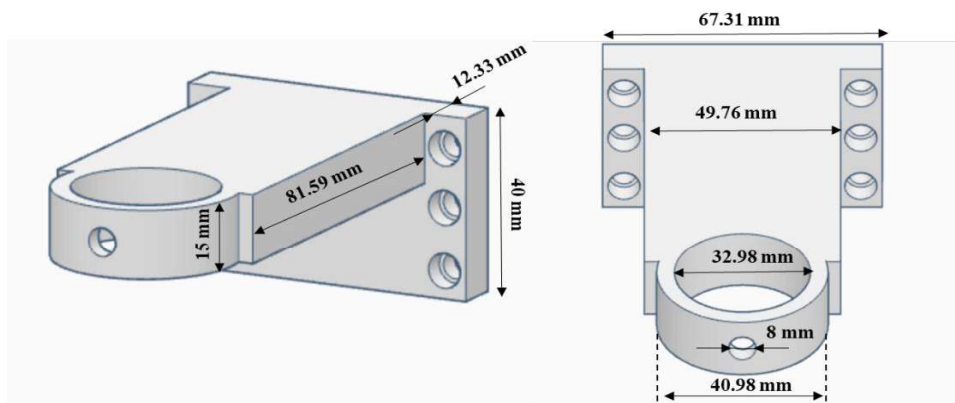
Scheme and dimensions of the extender sized to attach the device to the positioner.
